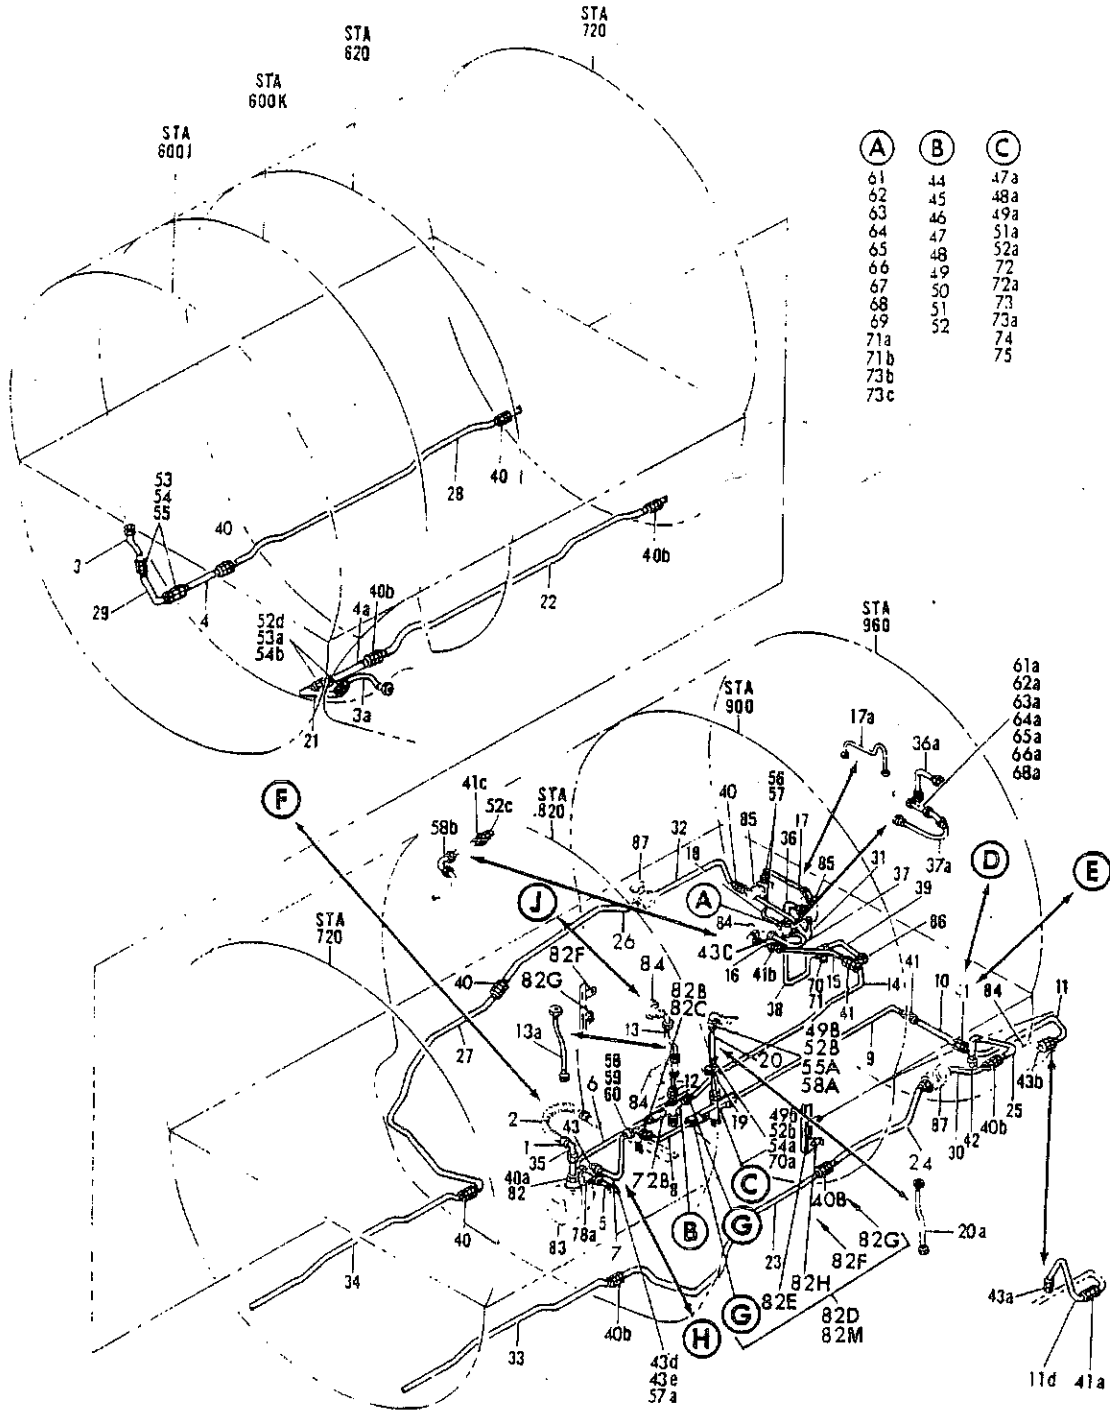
A. COMPRESSOR INSTL, ENGINE STARTER AIR
